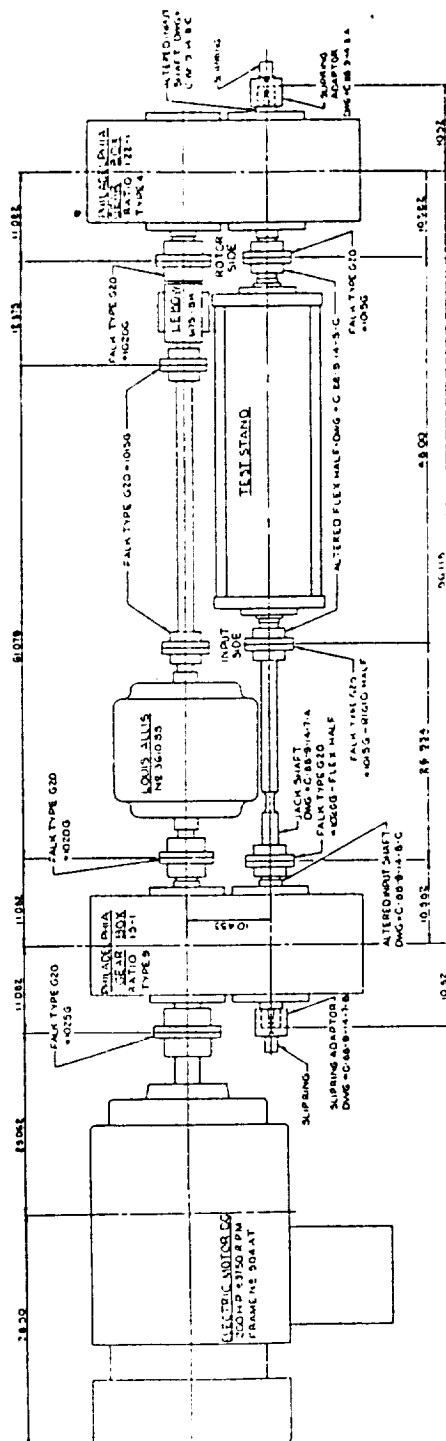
Drawing D-88-9-15-1. Plan view for the four square test rig.
